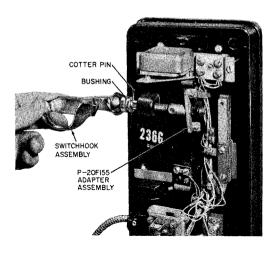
Installation of Adapter Assembly and Switchhook Assembly
